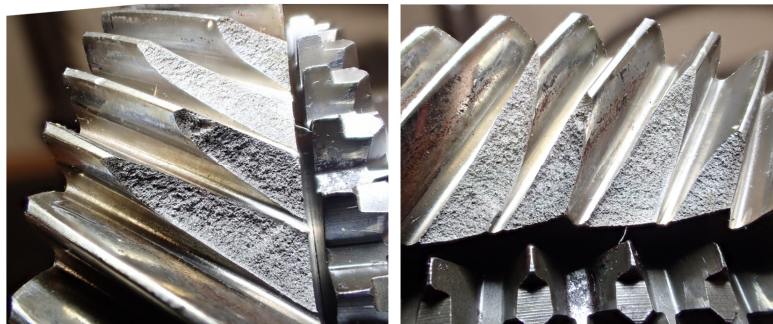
Test result of the first asymmetric rolled gearset – tooth breakage after 1h and 43min
